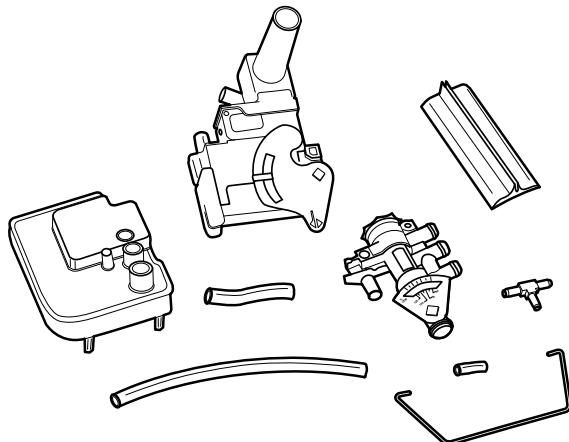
Components Selected From Universal Control Package for Installation on 37HS1 with 47-in. Diffuser or 37HS2.
